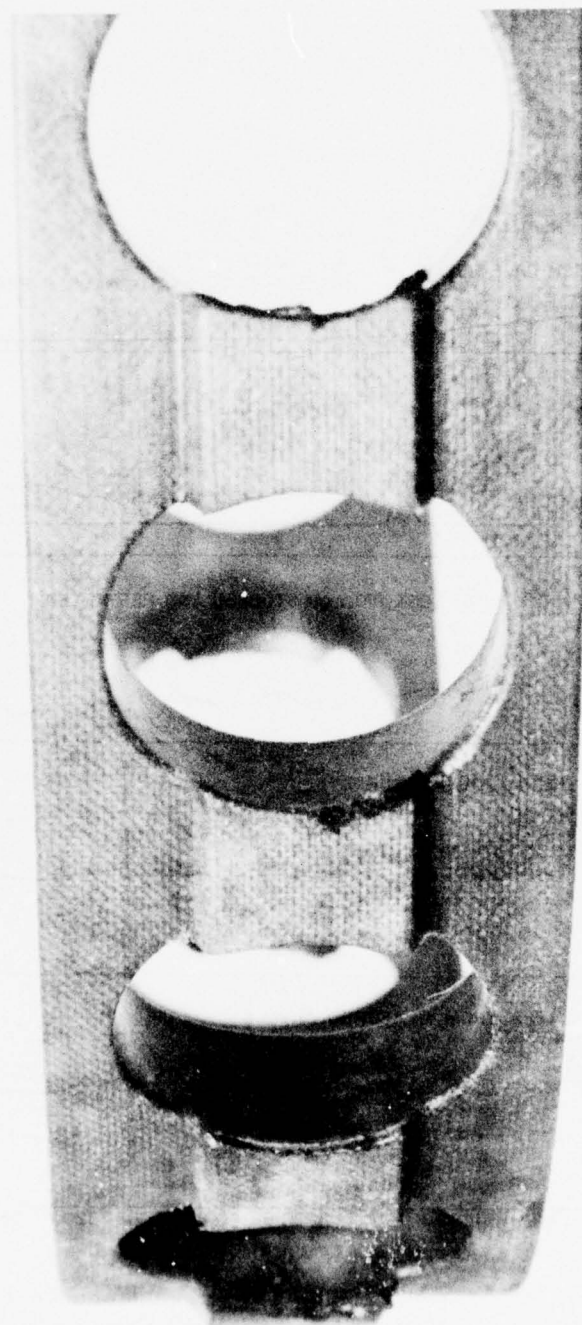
Debris Deposits on Ball-Pocket Tabs of Aft Bearing Retainer
